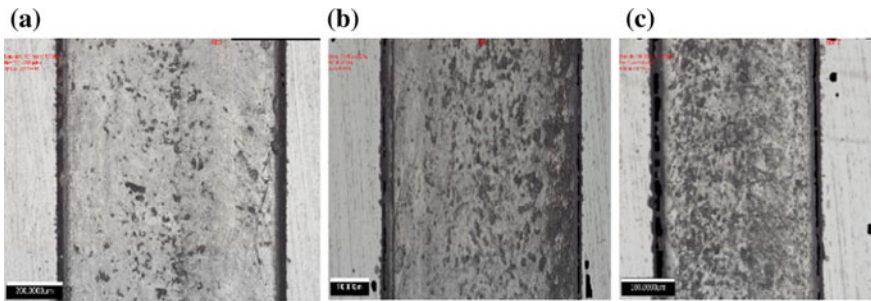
Machined slot with $0.1 \mu\text{m}$ feed per tooth with a 0.8 mm diameter tool, b 0.5 mm diameter tool, c 0.3 mm diameter tool
